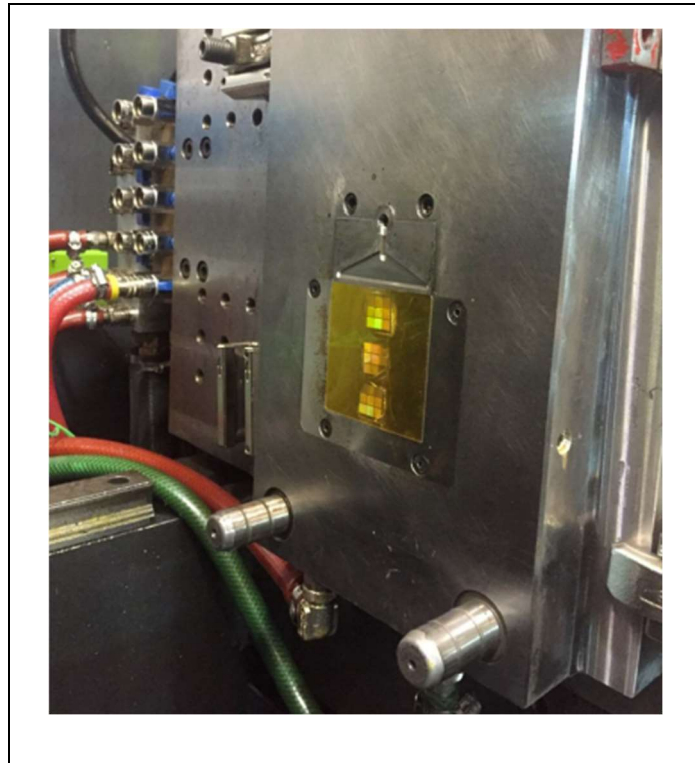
Detail of the film fixation inside the injection mould applied for the initial injection moulding trials.
